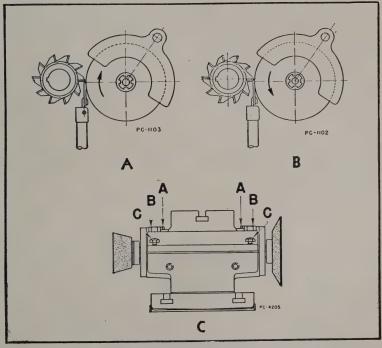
A. Grinding wheel rotating toward the cutting edge. B. Grinding wheel rotating away from the cutting edge. C. Rear view of the grinding wheelhead.
